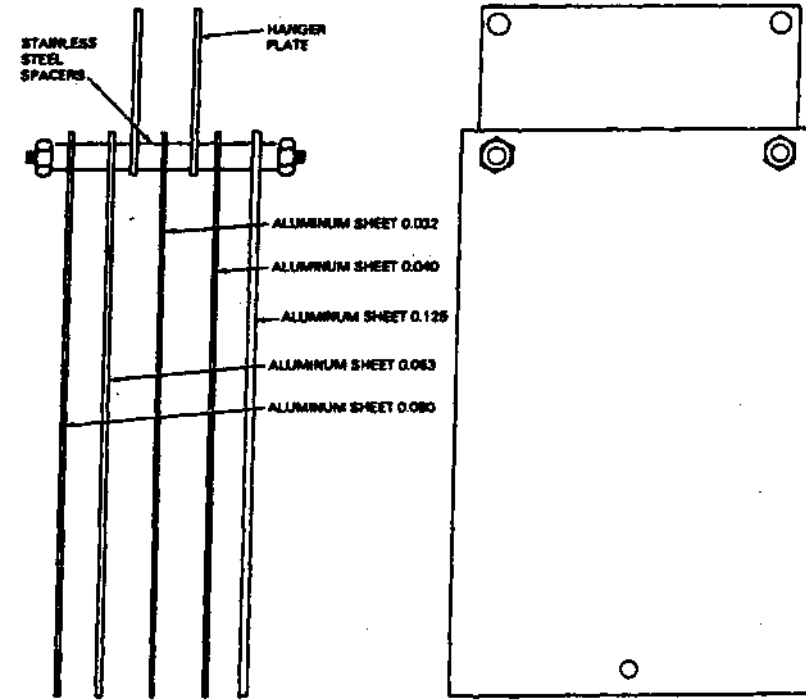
Schematic representation of (a) aluminum sheets, sheet spacing; and (b) rack assembly.
